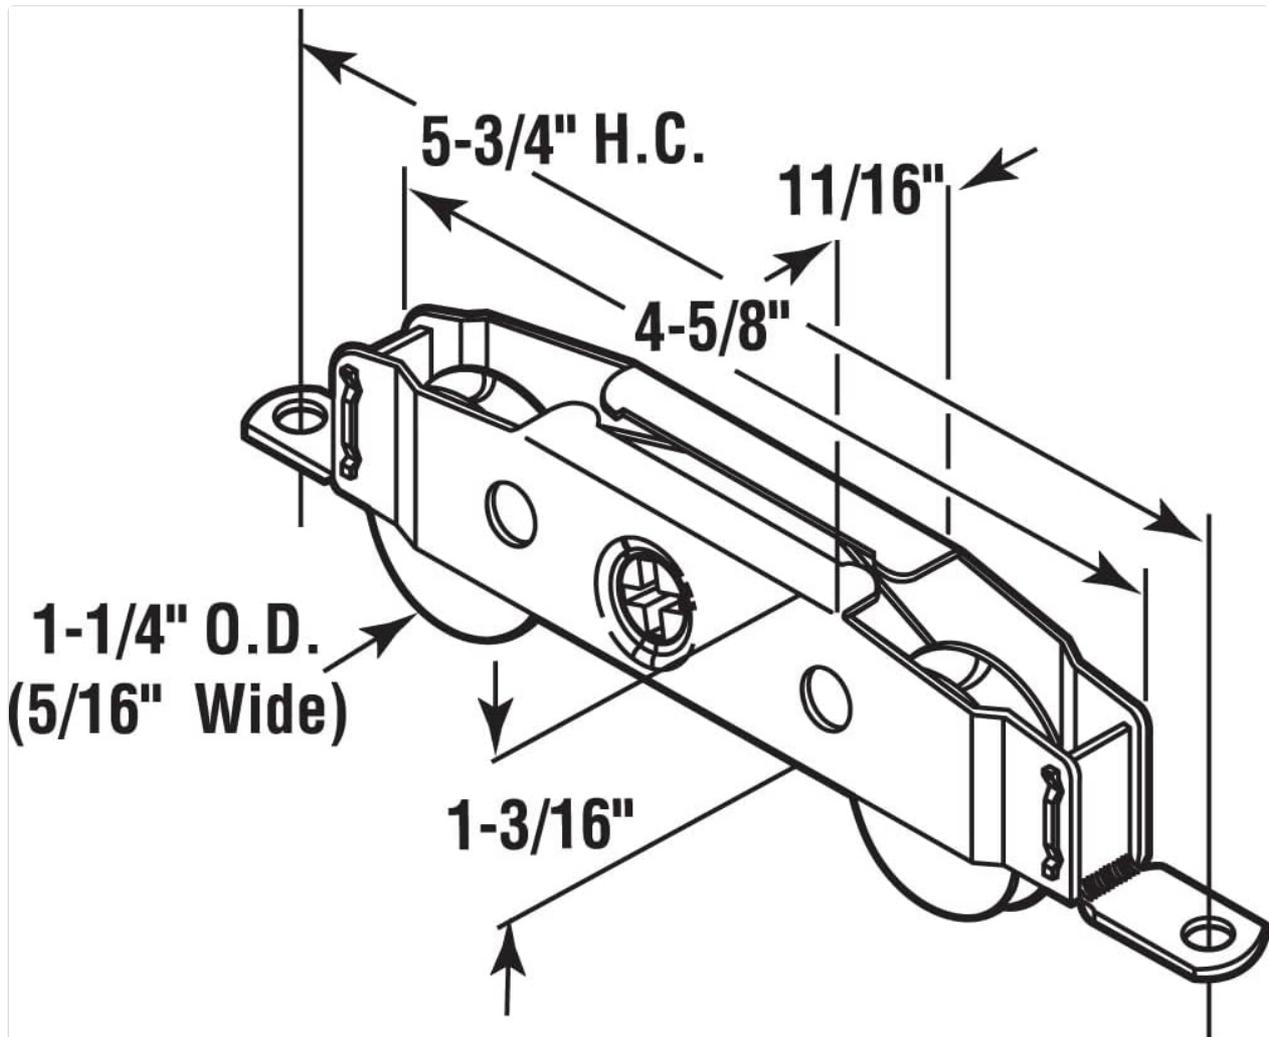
Line art drawing illustrating the dimensions of the Prime-Line D 1607 roller assembly.
